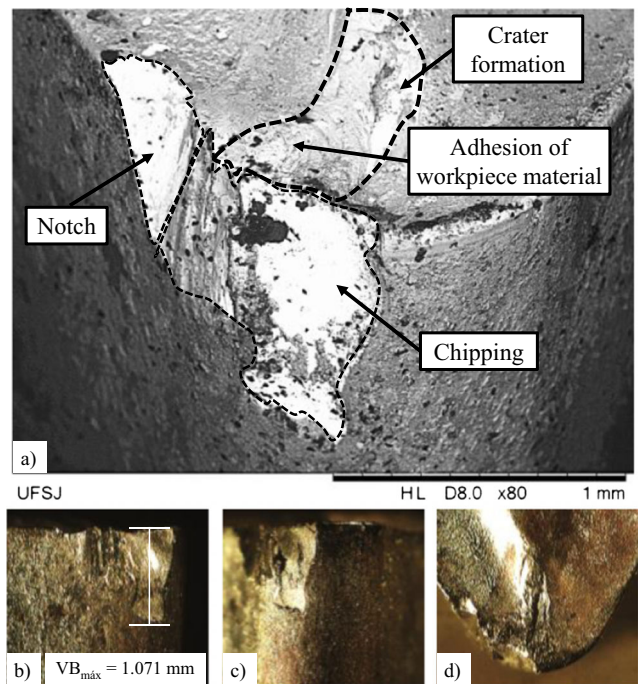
Cutting tool with VB_{max} = 1.071 mm used in dry turning with cutting speed of 200 m/min. a SEM. b Clearance surface. c Tip. d Rake surface
